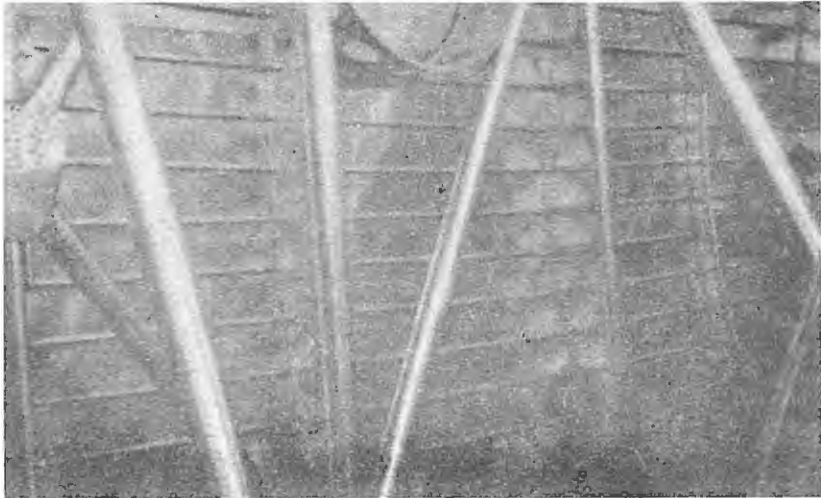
Body-panel Construction; 18-8 Steel Spot Welded
